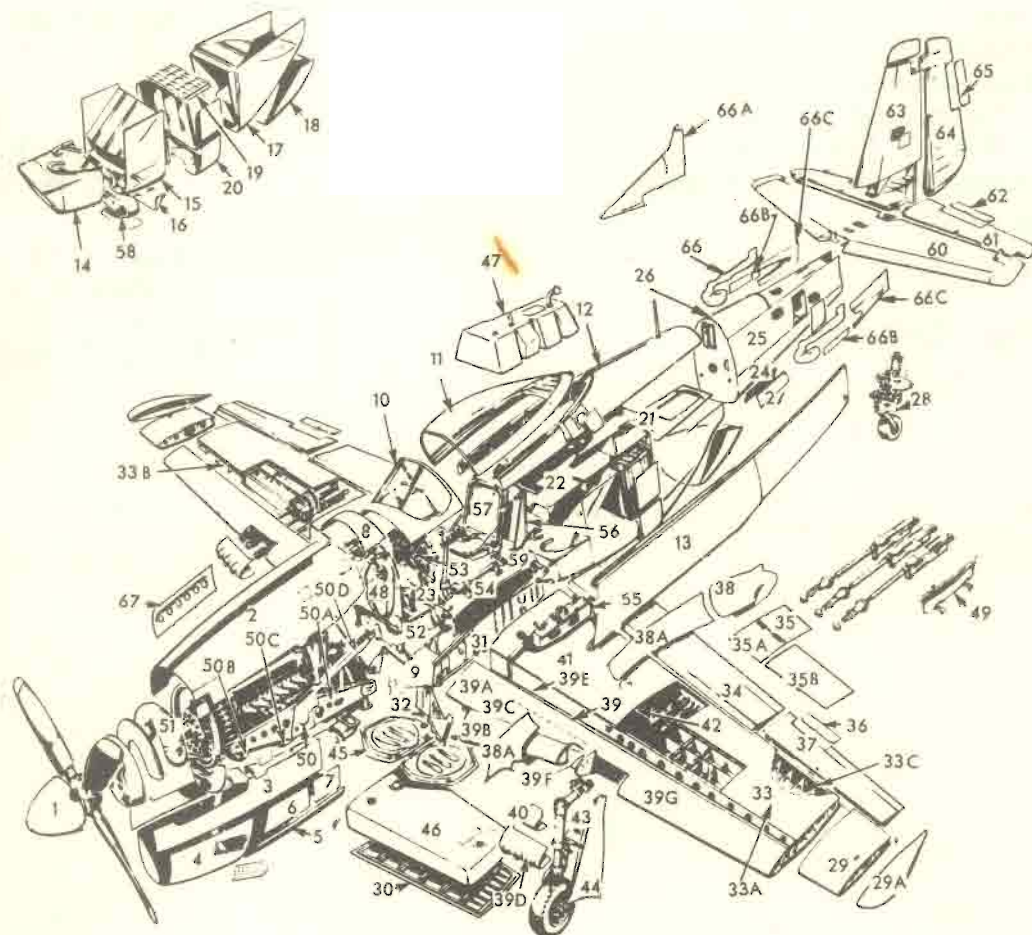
EXPLODED VIEW OF AIRPLANE
